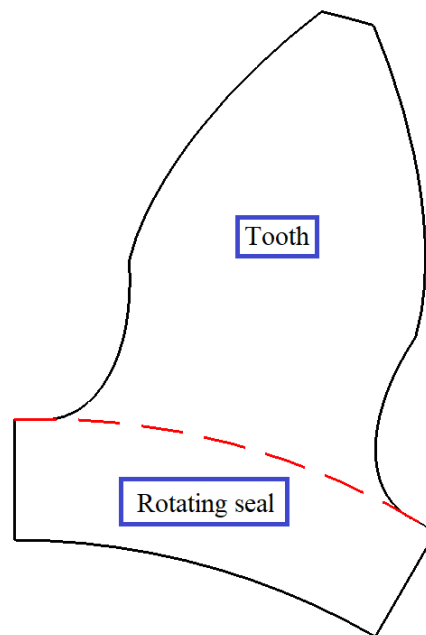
Front view of a tooth of a gear wheel showing the separation line between the tooth and the rotating seal.
